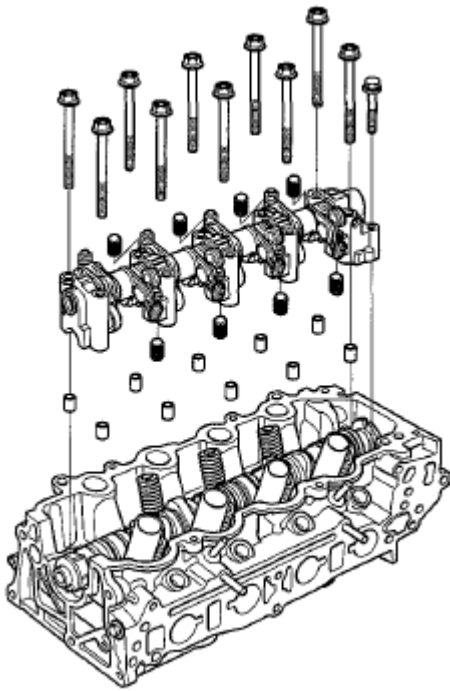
Identifying Rocker Arm Adjusting Screws
